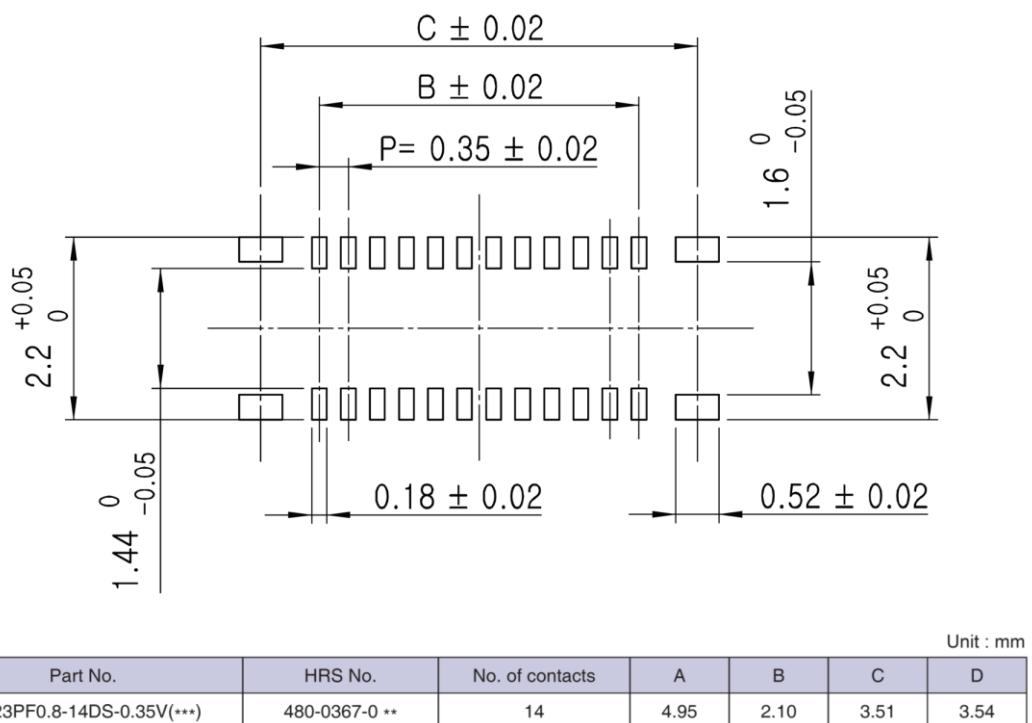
Recommended PCB Layout of Hirose BM23PF series
